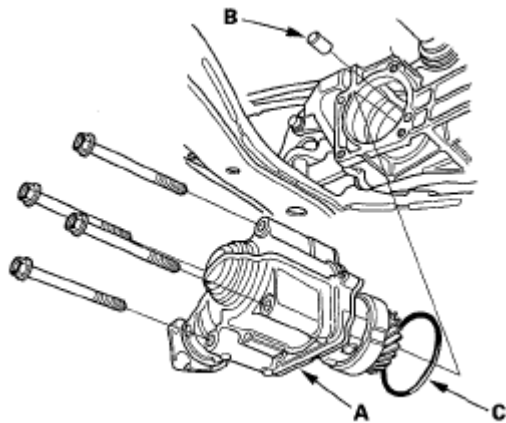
Identifying Transfer Assembly, Dowel Pin And O-Ring
